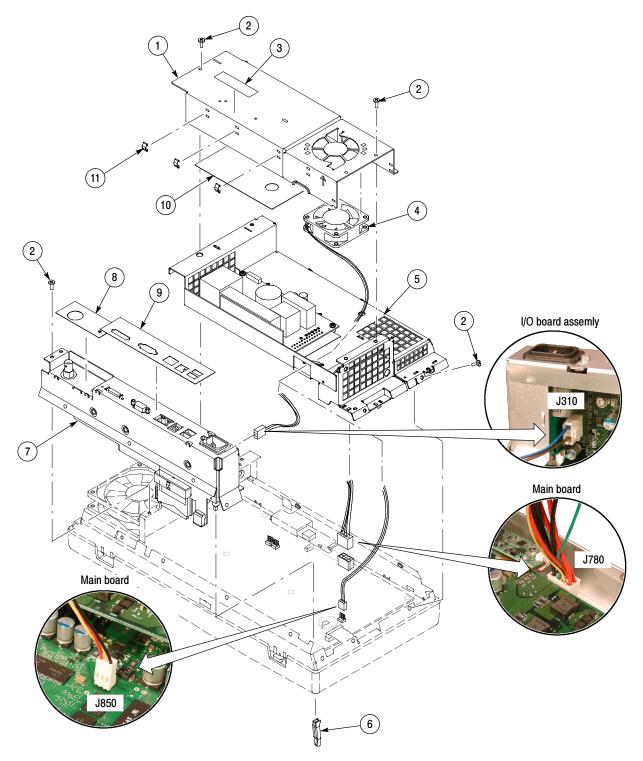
Exploded view: MSO4000 Power Supply and I/O board
